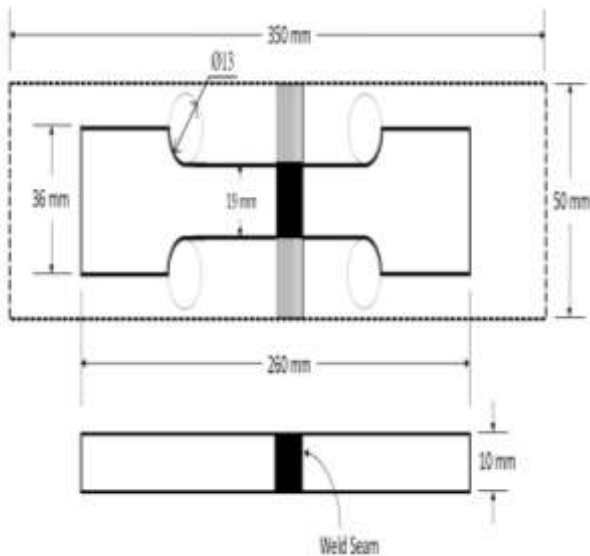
Tensile test specimen dimensions in mm as per ASTM A307
